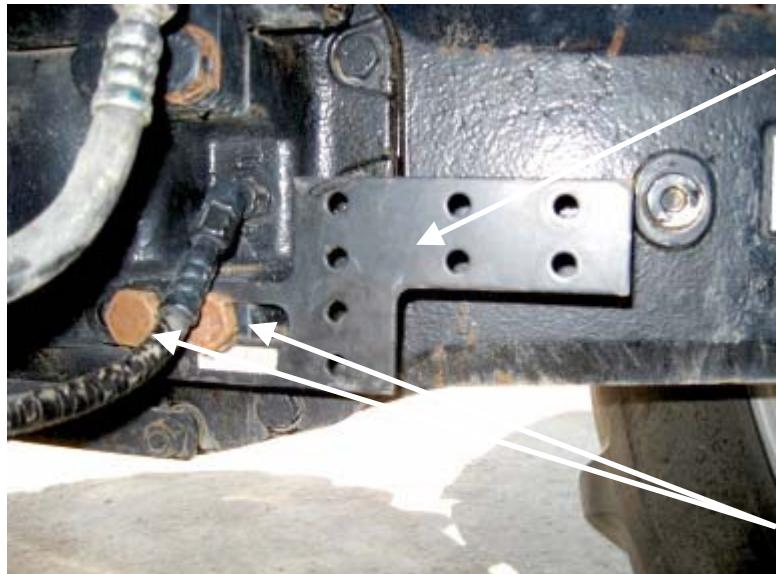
Wheel Angle Sensor Mounting Position (Axle Type 3 Shown)
